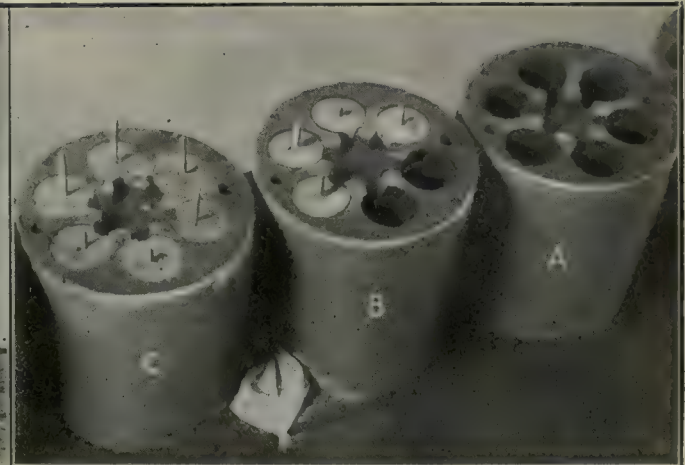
SAND MOLDS WITH AND WITHOUT CORES
